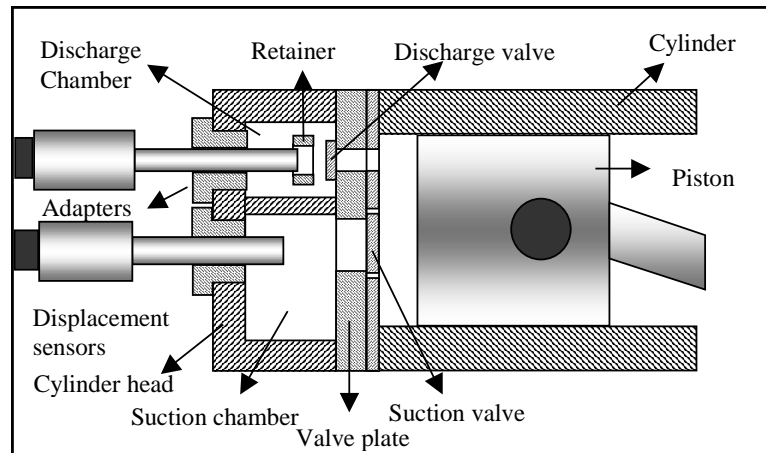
Fiberoptic sensor assembled in the cylinder head
